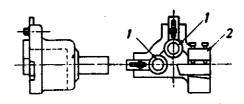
Bar ending tool holder 1. Roller, 2. Tool holder
